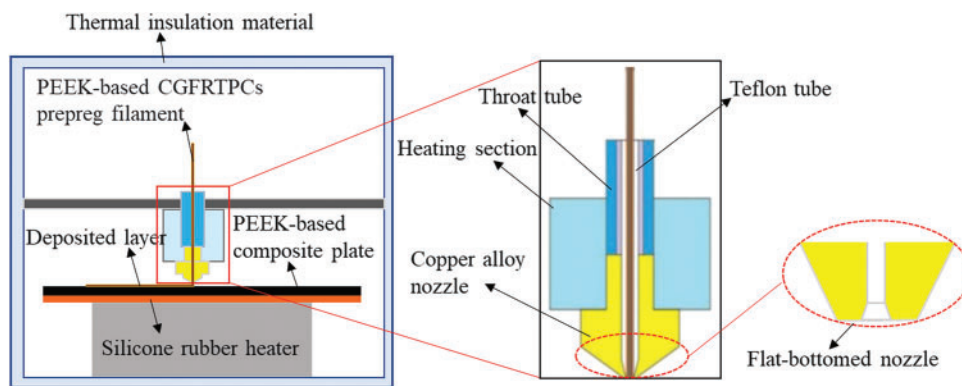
Diagram of enclosed print chamber of the FDM3D printing device
